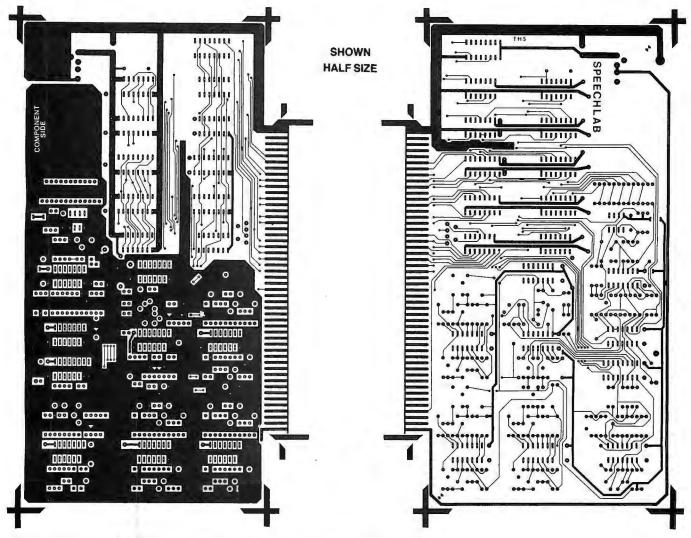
Etching and drilling guides for pc board are shown half size. Guide at left is the component side. Component layout is in Fig. 9.
